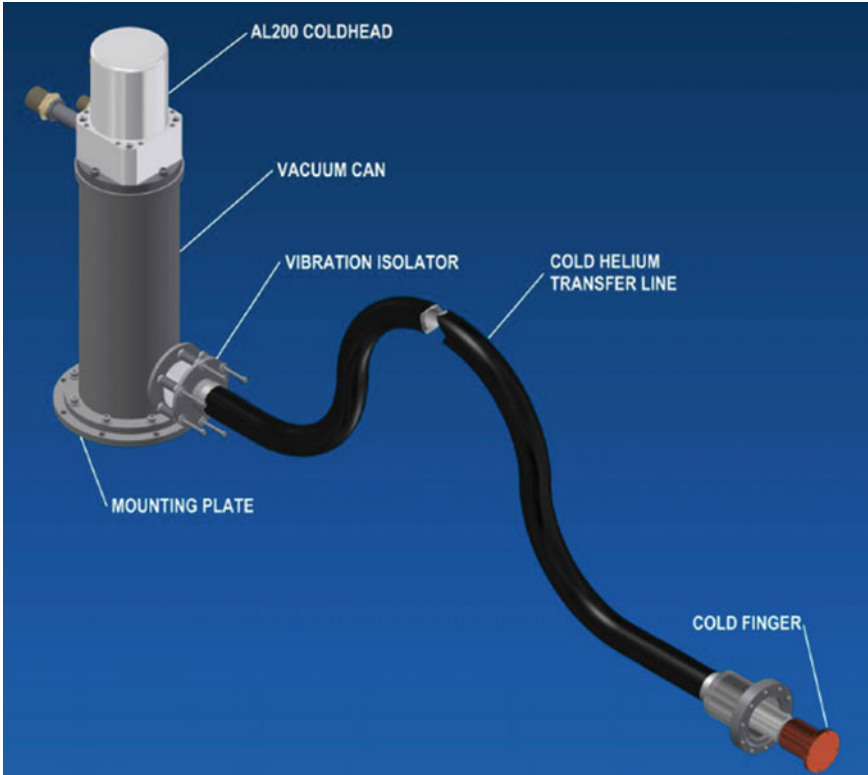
Cryocooler cold finger cooling with cold helium transfer line (*courtesy of ICC Press*)
